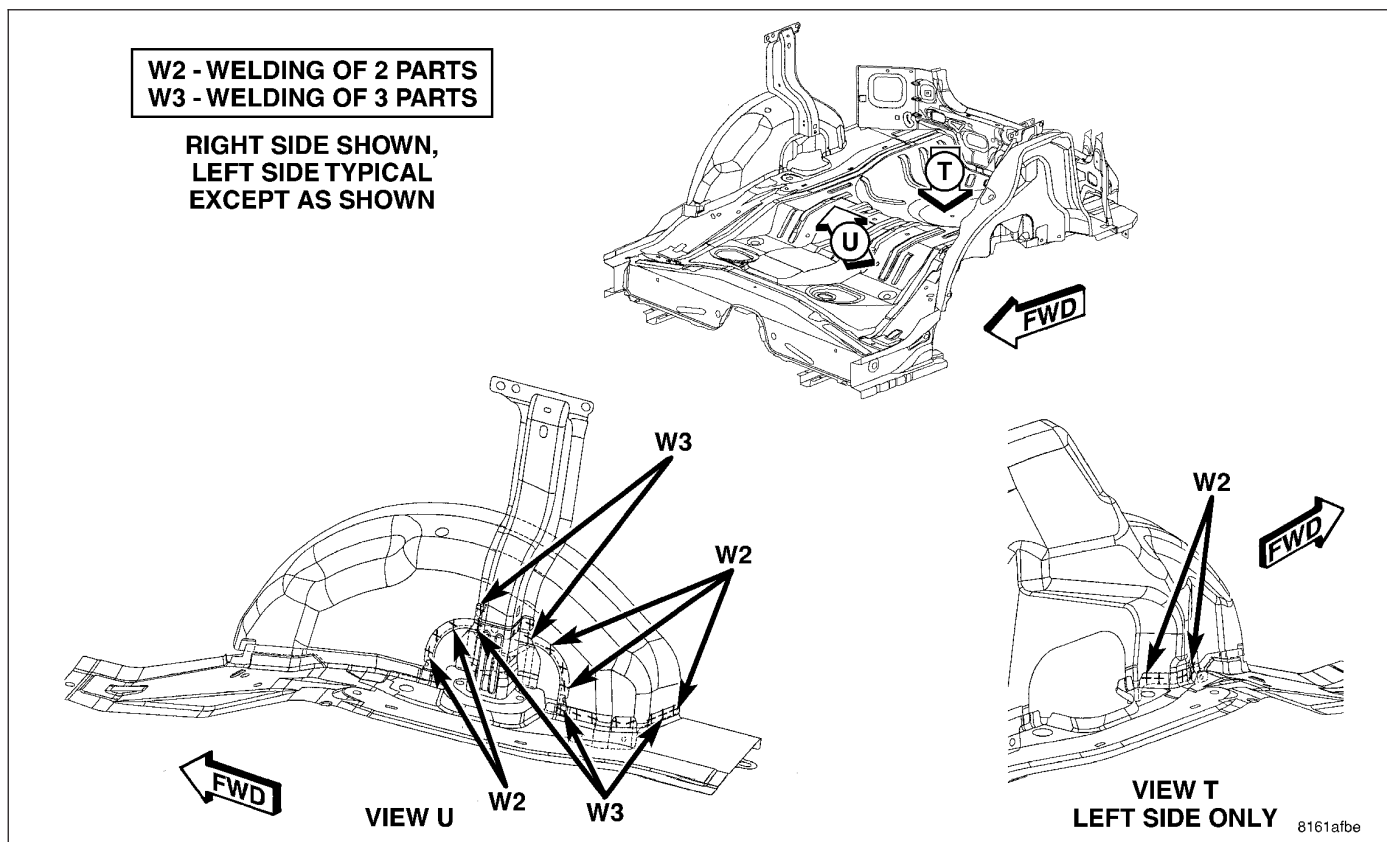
REAR FLOOR ASSEMBLY (4 OF 14)
